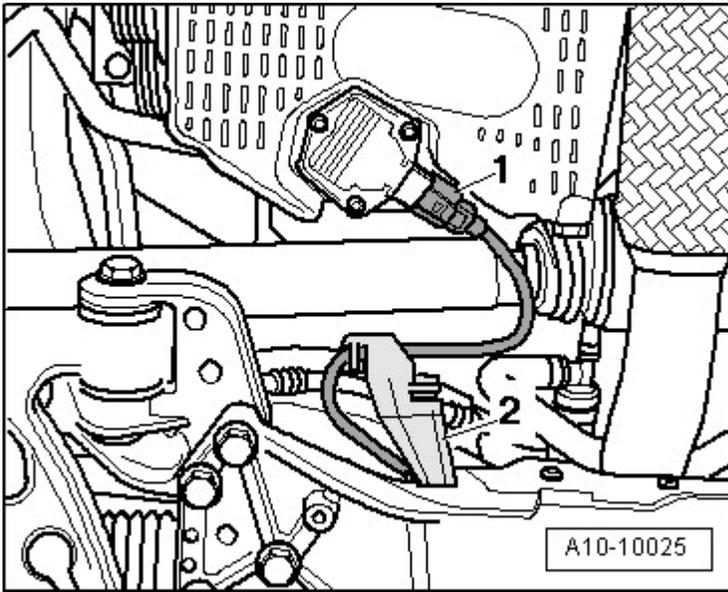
Identifying Oil Level Thermal Sensor G266 Wire On Subframe
